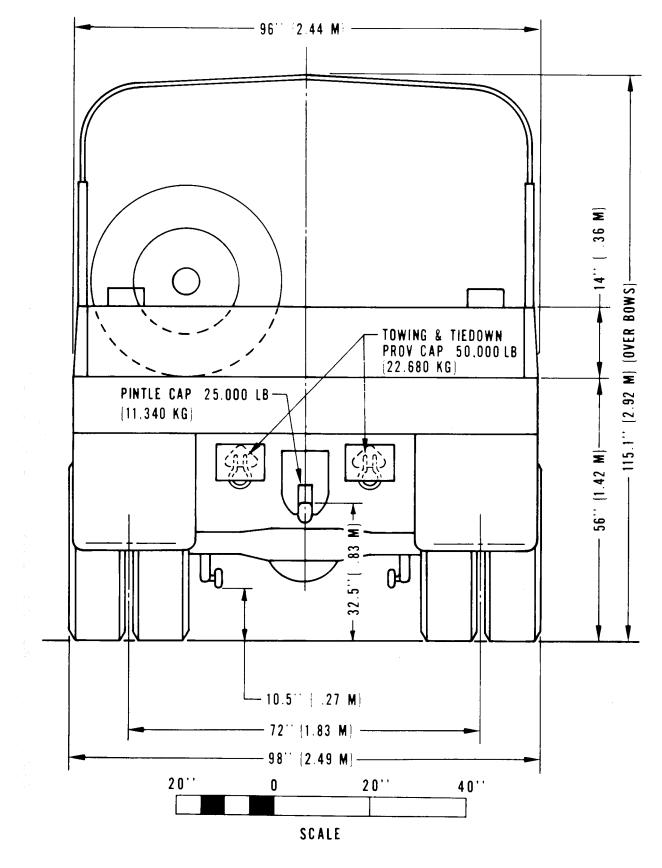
Rear elevation of truck, cargo, WWN and WOWN, M813.
